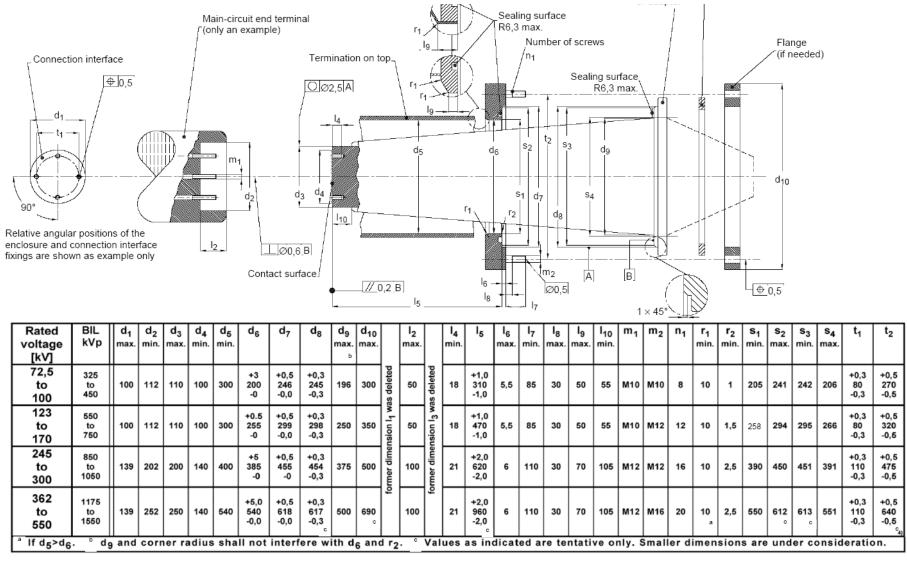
Dry-type cable connection assembly – Assembly dimensions
